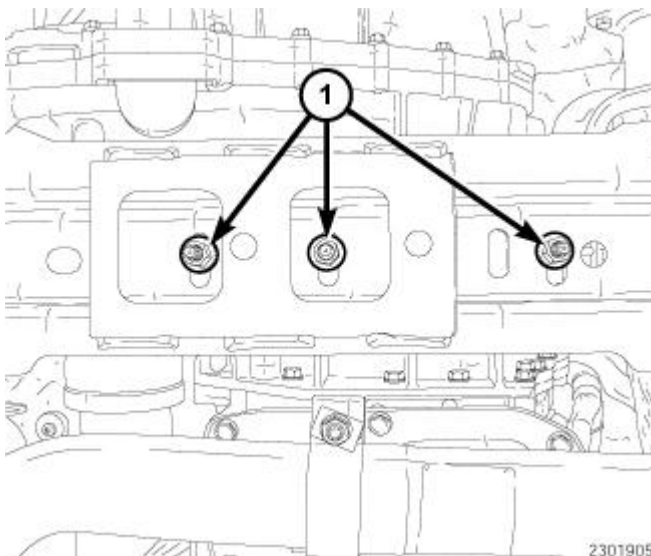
Transmission Mount To Crossmember Retaining Nuts
